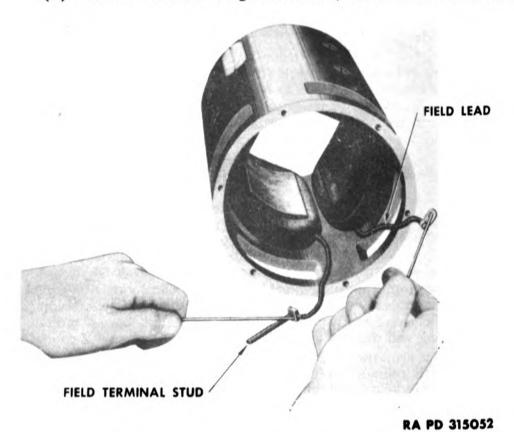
Testing Field Coils for Open Circuits with Test Probes—Group 4 Generators
